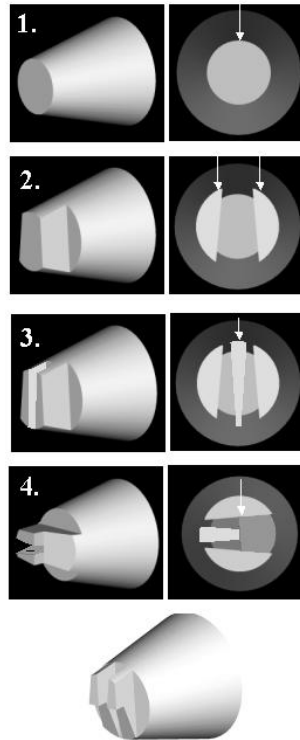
Procedure for ion milling (shaping) a micro-threading tool. For all sputter steps, a tool is fixed. Arrows indicate the direction of the ion beam. A completed two-tip design is shown at bottom.
